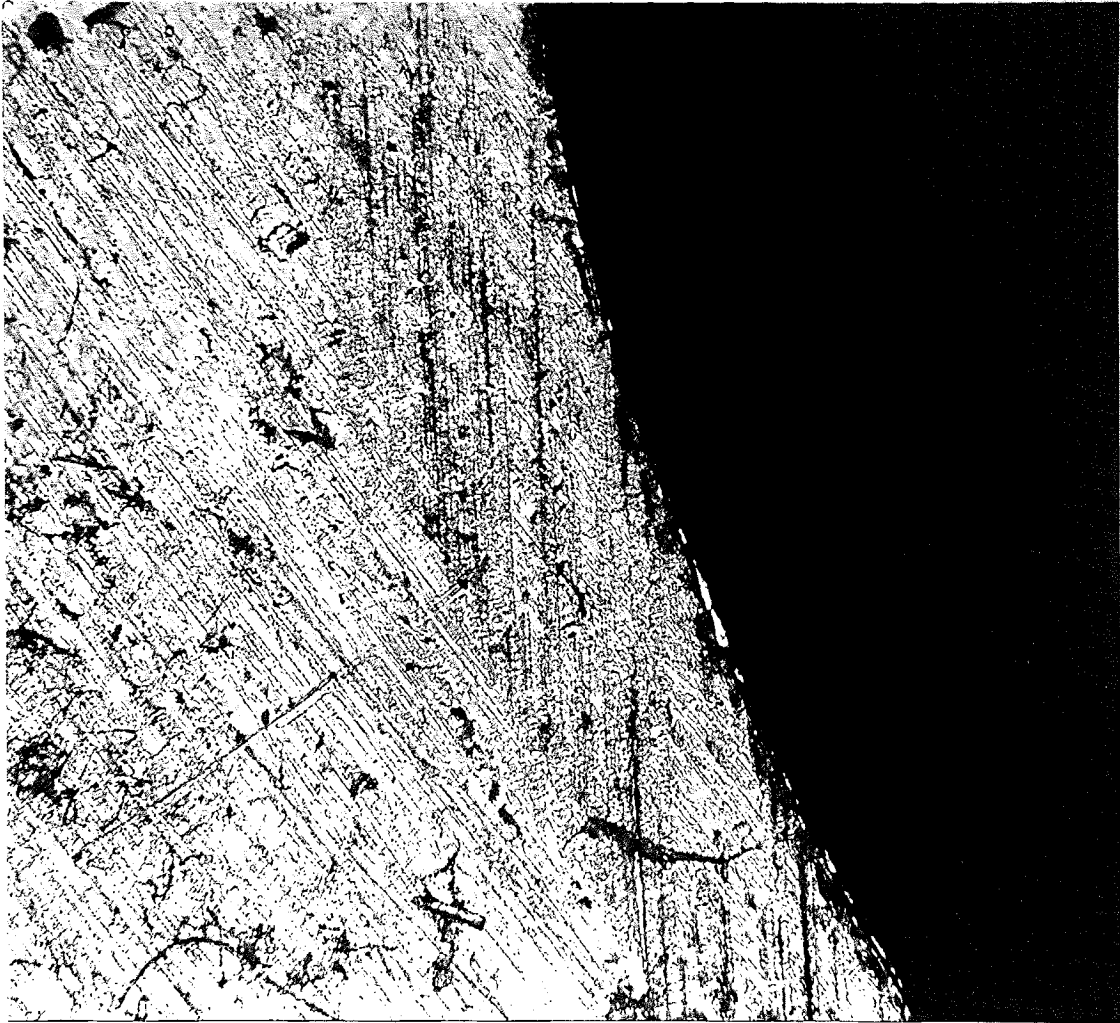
160X, Hole region of nickel silver contact spring before deburring.
